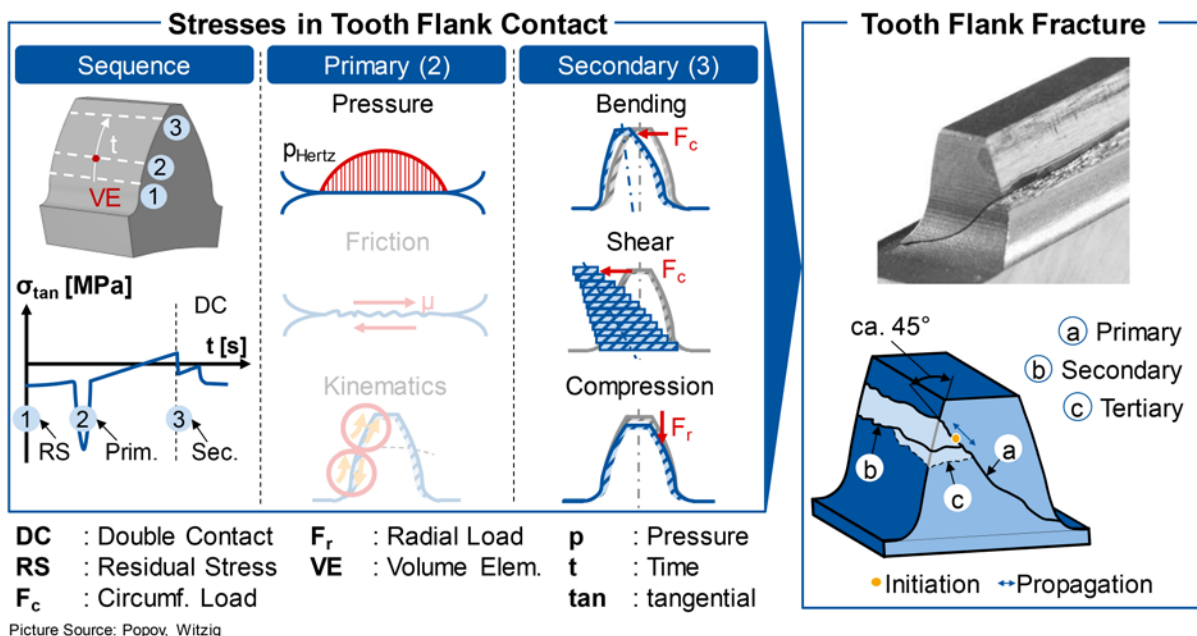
Stresses in Tooth Flank Contact and Tooth Flank Fracture [Ref. POPO 10, Ref. WITZ, Ref.12].
